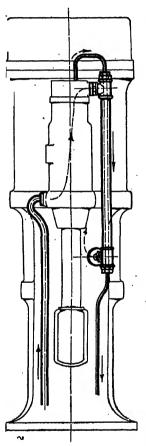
Sulzer Air Compressor Cooling Water System.
